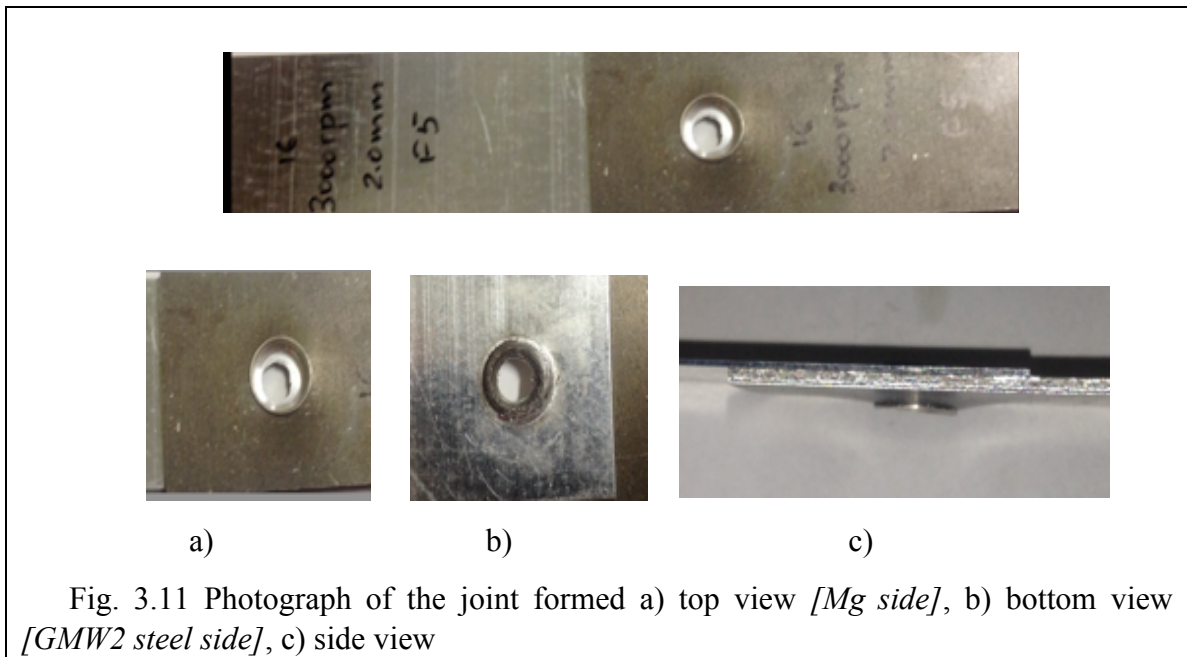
Photograph of the joint formed a) top view [Mg side], b) bottom view [GMW2 steel side], c) side view
